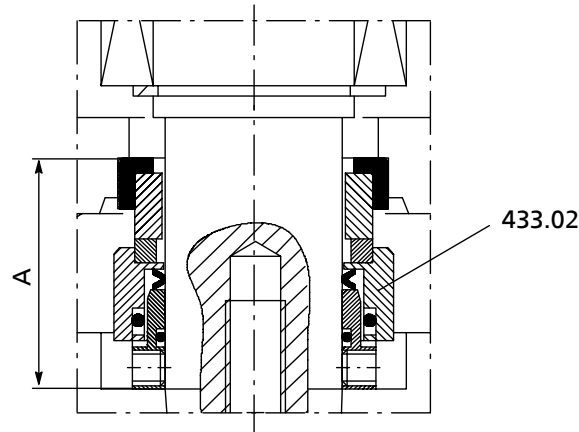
Sectional drawing of mechanical seal with covered springs (HJ)
